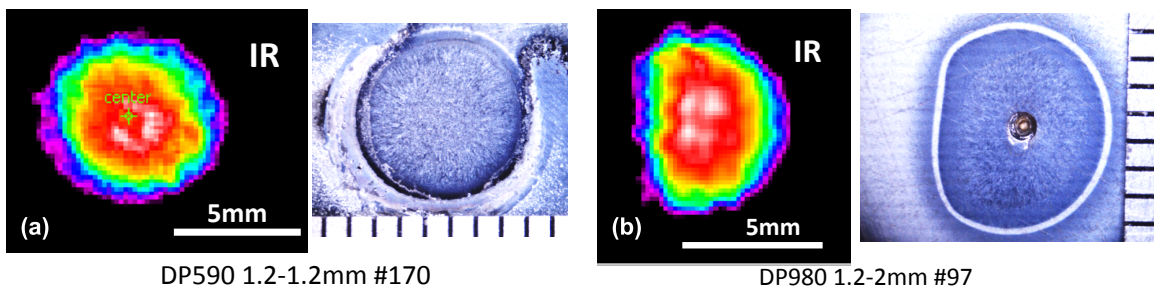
Comparison of the processed postmortem IR thermal signature: (a) good weld; (b) weld with irregular shape and void defect.
